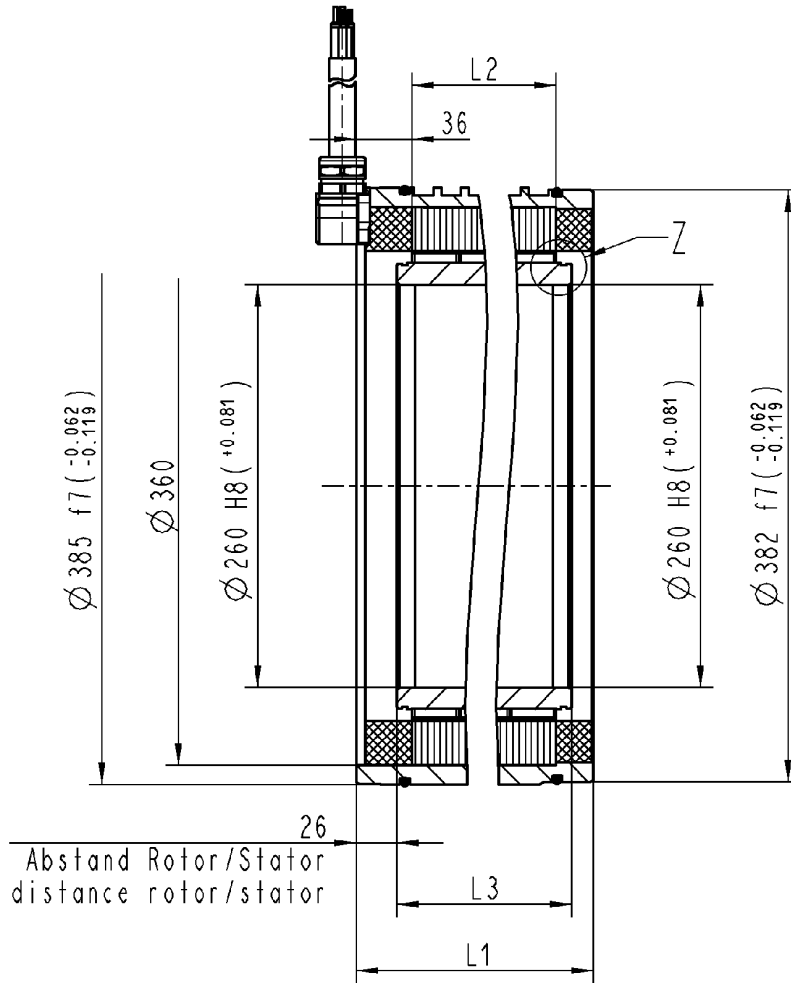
Dimension sheet for frame size 360, electrical connection "CN"
